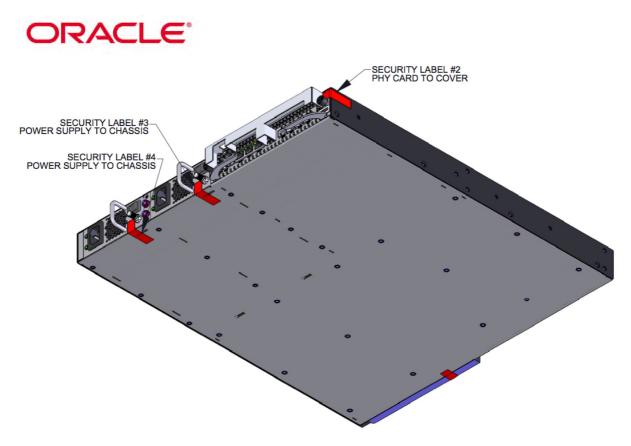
Acme Packet 4500 Tamper Evidence Label Placement Rear Bottom
